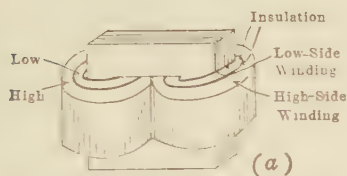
(a).—Arrangement of coils and core in a core-type transformer.
